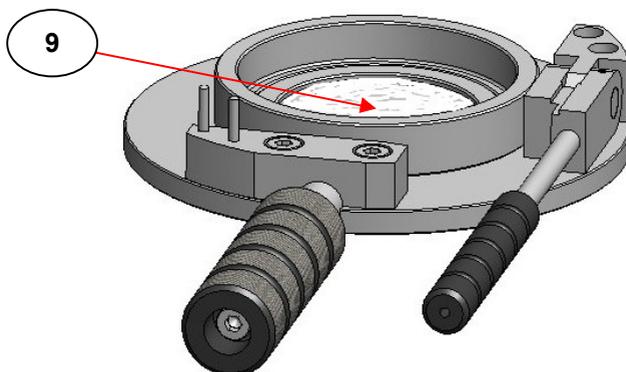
Lower Platen Pressing Assembly with Spacer Ring, Guide Ring and Lower Aluminium Foil
